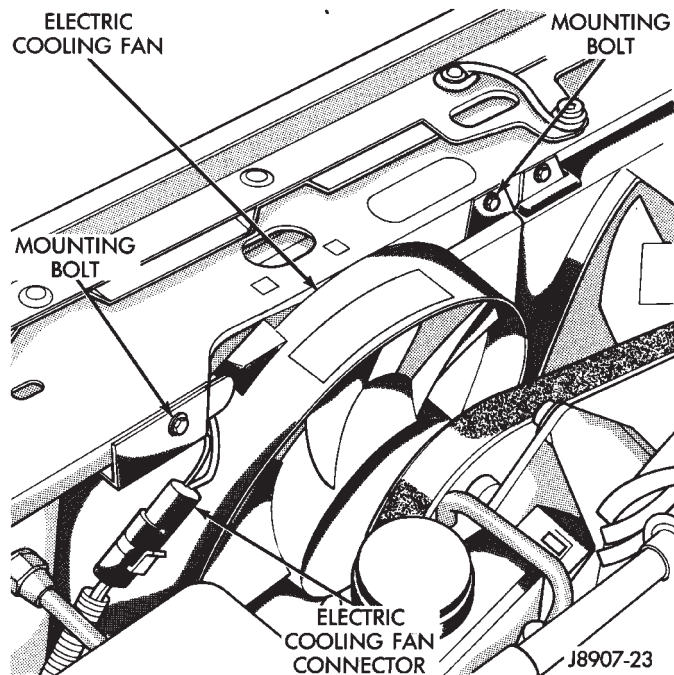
Auxiliary Cooling Fan—Remove/Install—Typical
